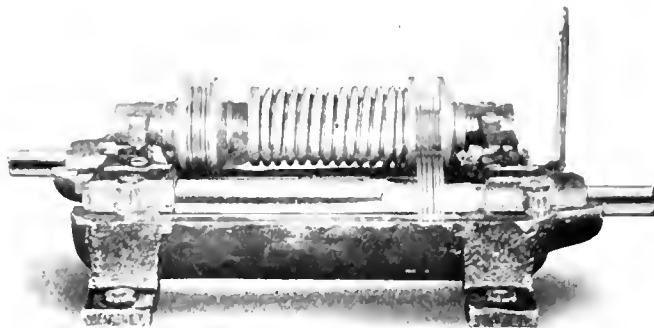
View of the Dill Drive with Cover removed from Casing, showing the Alternate Sets of Flat and Taper Disks which Transmit the Power.
